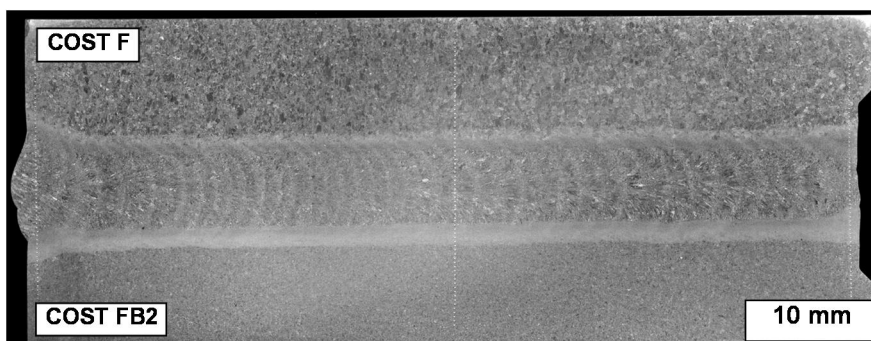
Macrostructure of the cross-section of the weld joint.
